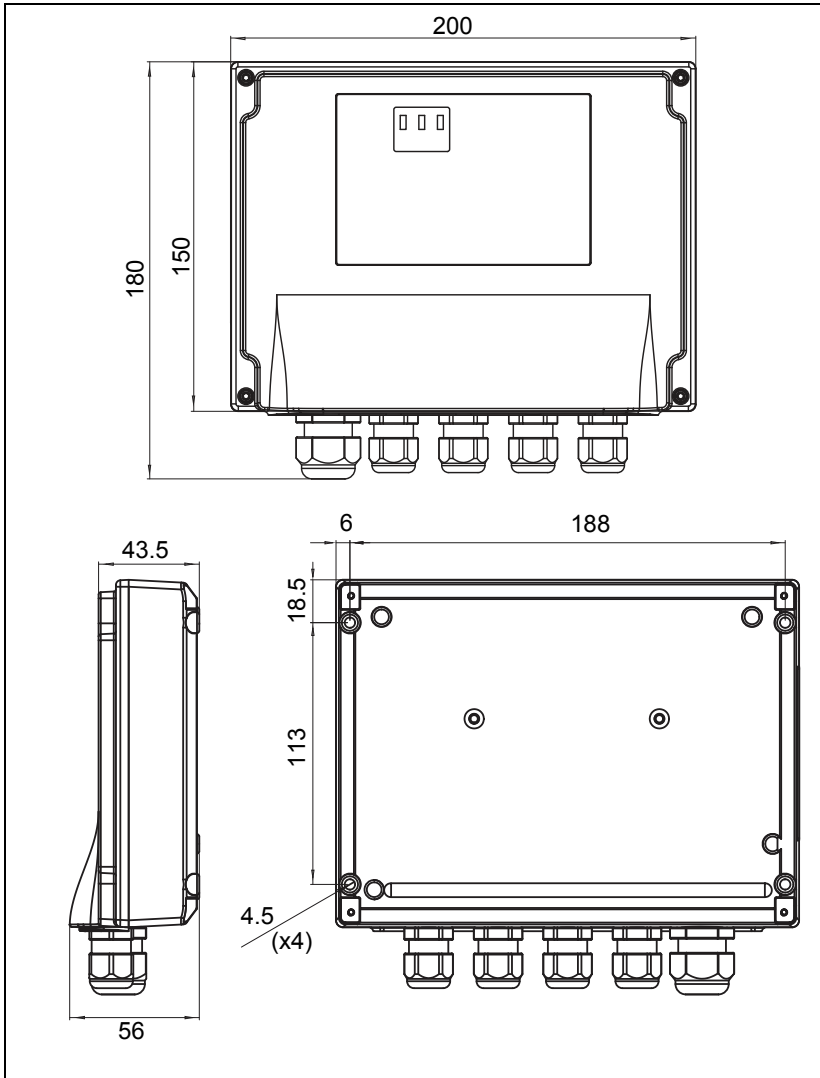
Dimensions, EMX-B15 control unit (mm).
